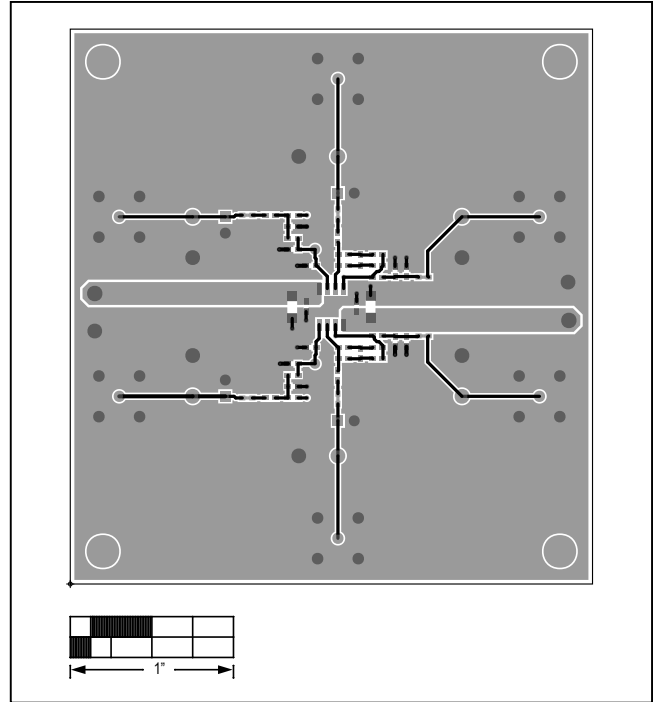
MAX44292 EV Kit PCB Layout—Component Side
